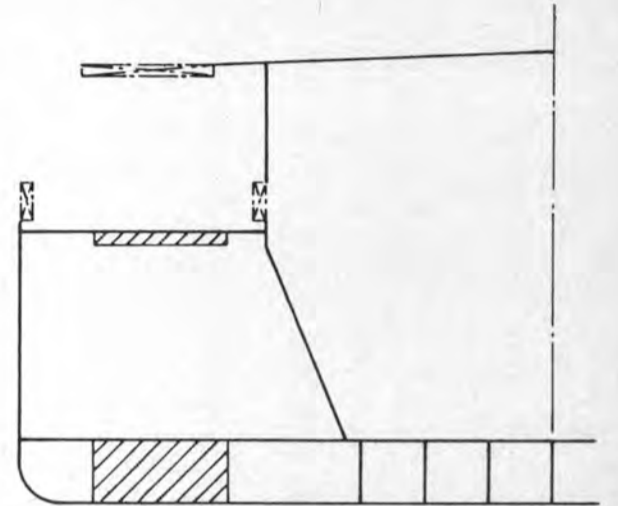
Cut longitudinal tunnel bulkhead above main deck, jack up the spar deck to required height and insert new longitudinal sections in tunnel bulkhead and shell.
